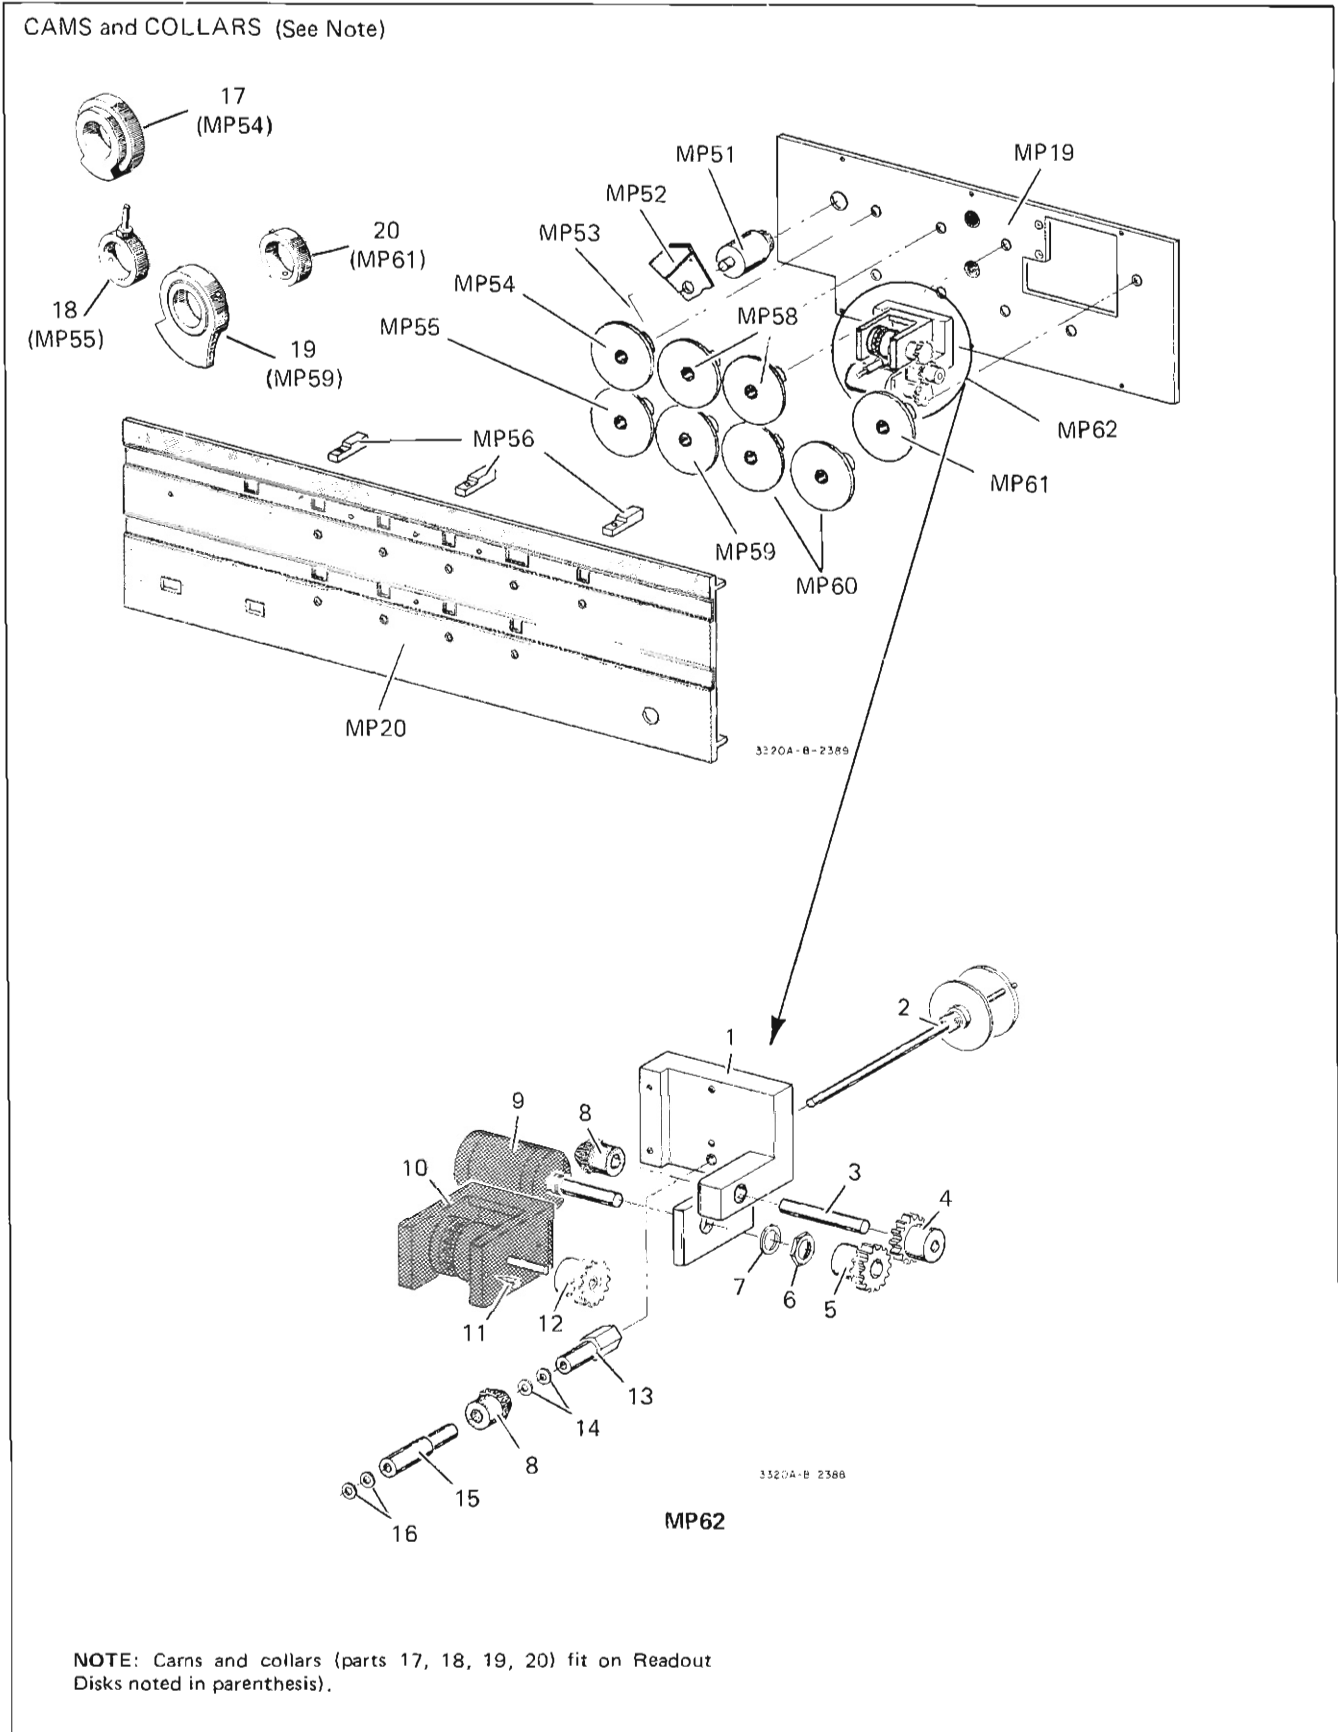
Front Panel and Vernier Control Mechanical Parts.
